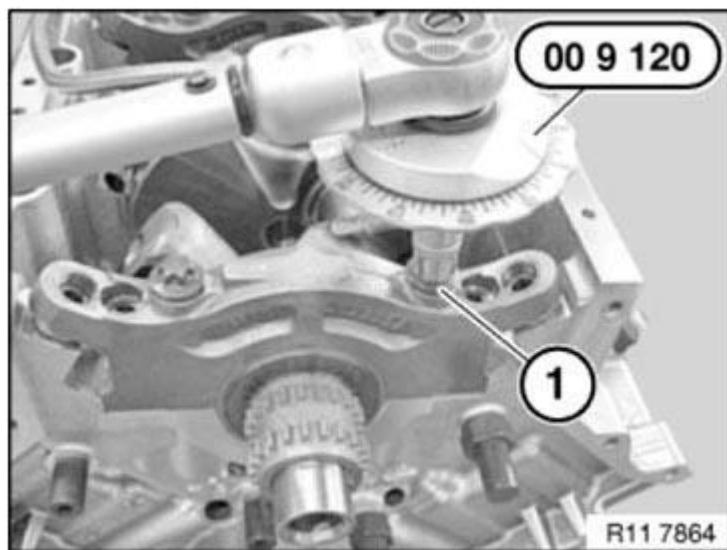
Securing Collar Bolt With Special Tool 00 9 120
